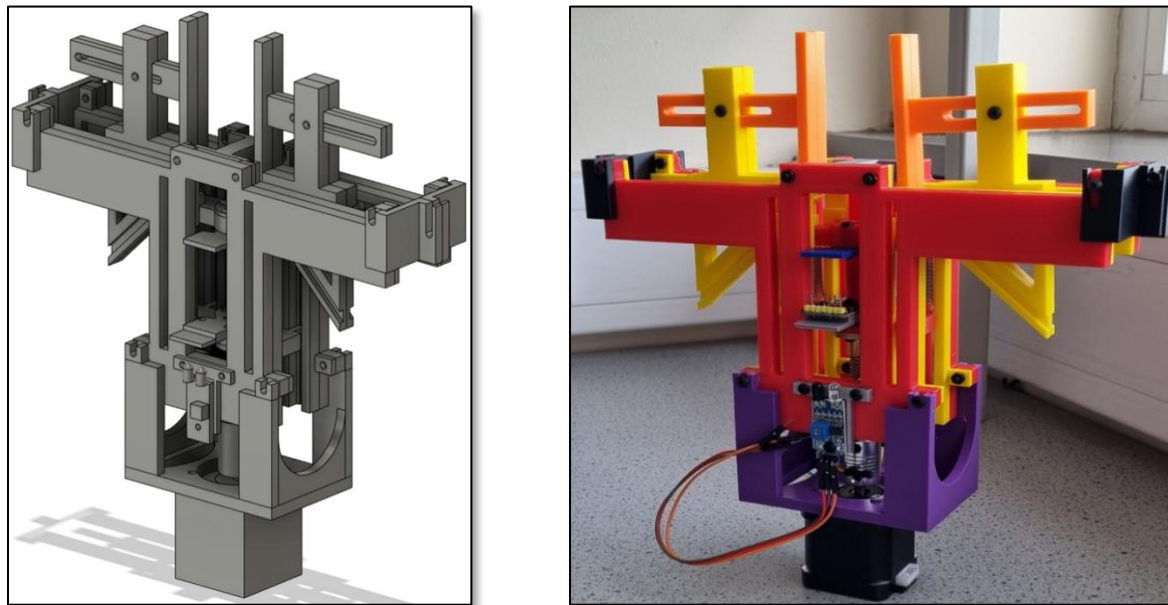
3D parts assembly of the complete robotic gripper design (left panel) and final result of the real system (right panel): the 3D parts are printed with an Original Prusa i3 MK3S+ 3D printer and assembled using the devices and components reported in the text description (Section 2)
